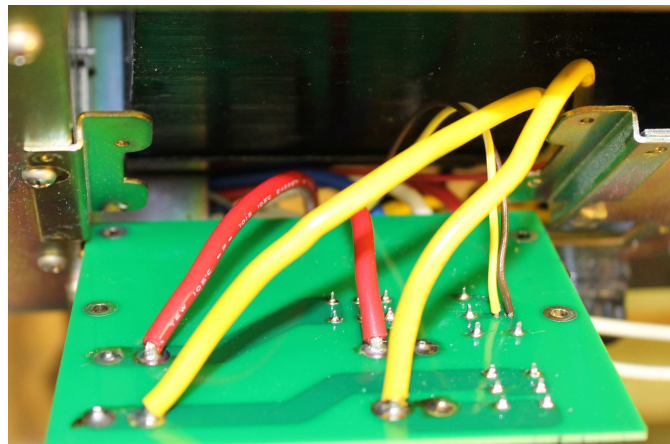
Inserting Step-Start PCB and Routing Wire Leads
